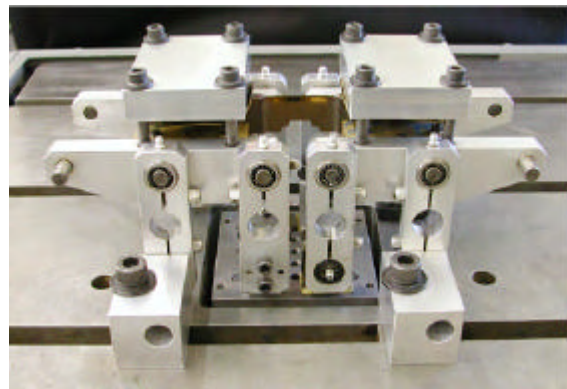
Four point bend fixture used for Ti-6-4 vane edge feature samples, both single-edge (R = 0.1) and double-edge (R = -1), with a single-edge sample positioned for testing.
